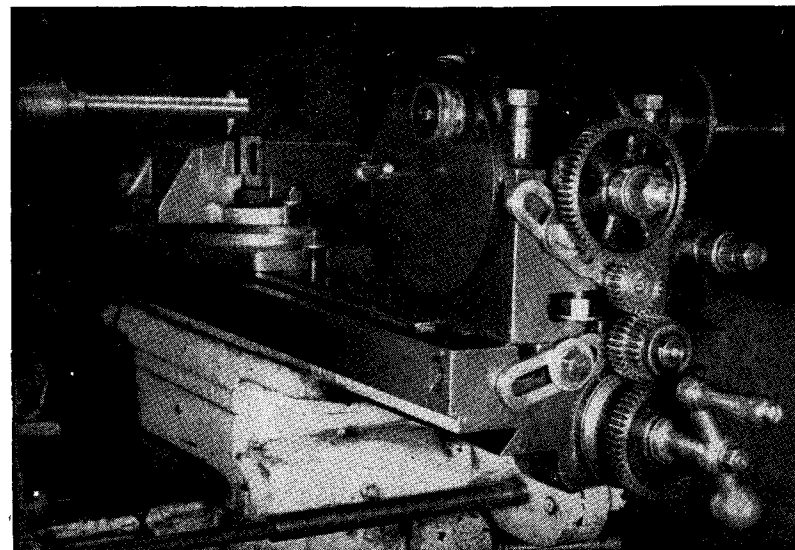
Rear view of the graduating setup, showing the gearing used between headstock spindle and feed screw. (James Anderson)
